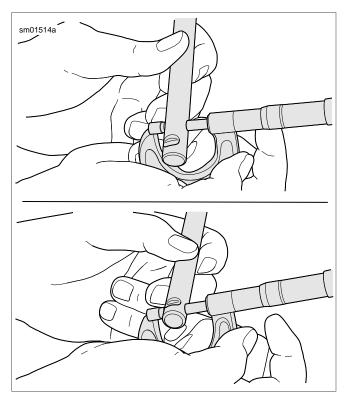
Measuring Rocker Arm Shaft Diameter at Bushing Position (top) and Cover Position (bottom)
